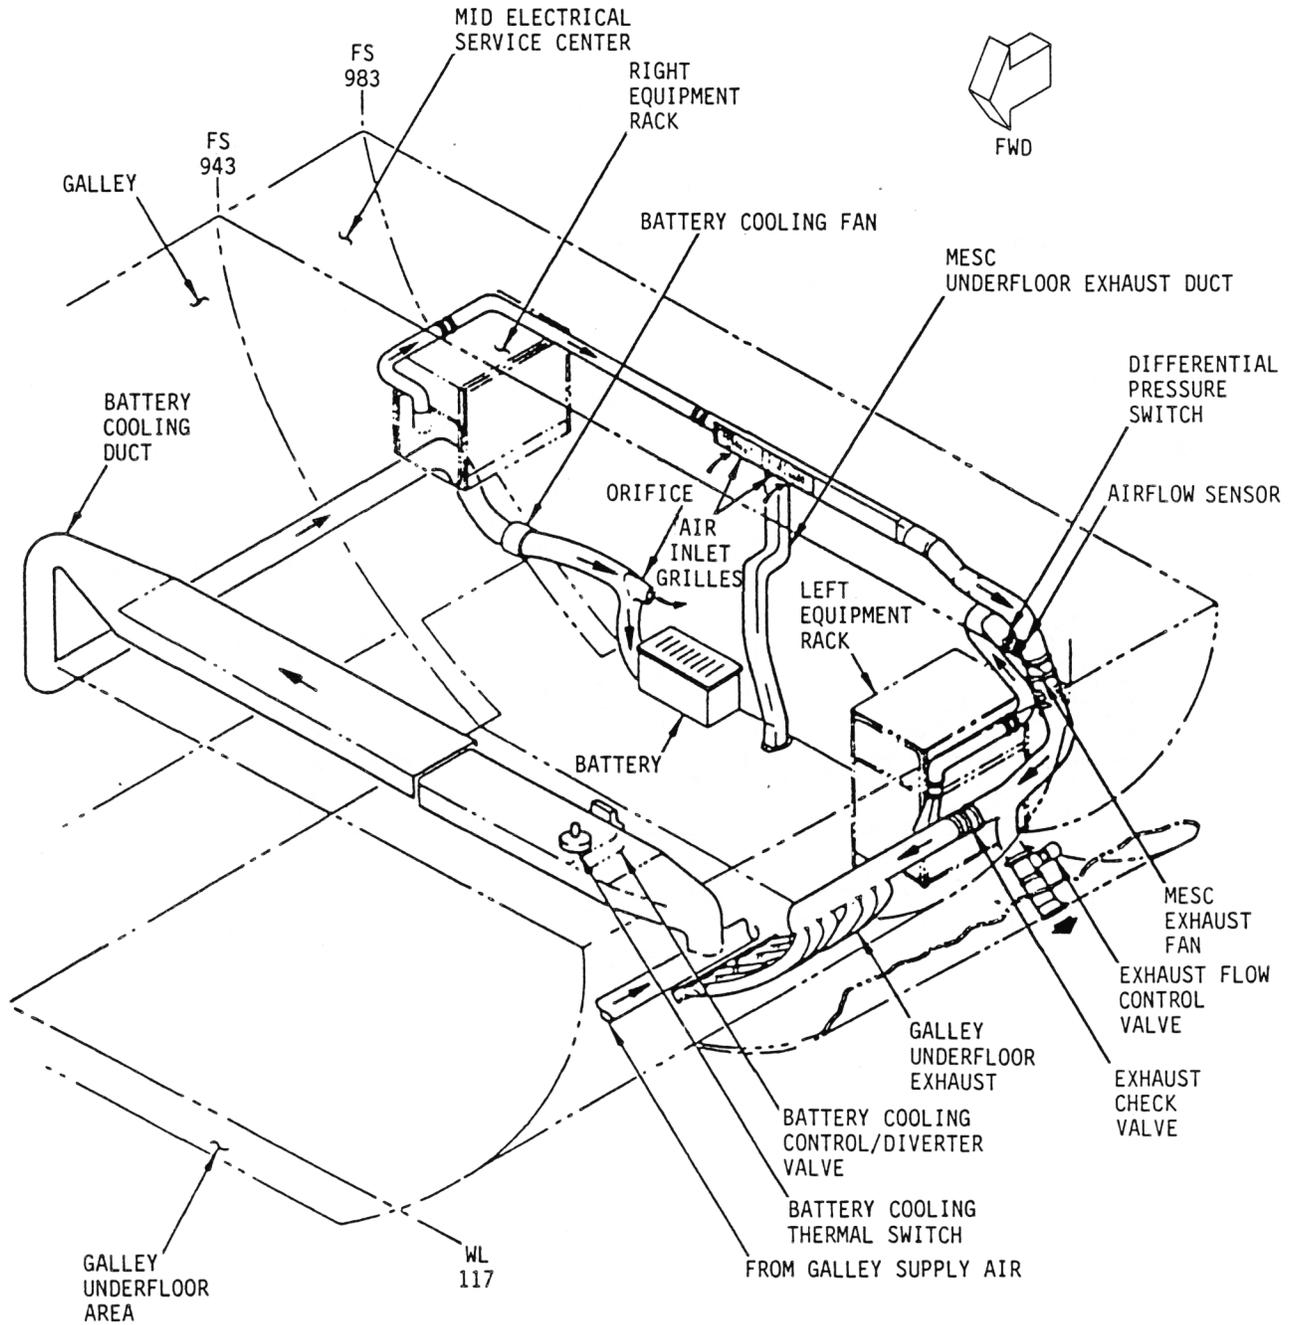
LOCKHEED L-1011 MID EQUIPMENT COOLING SYSTEM
